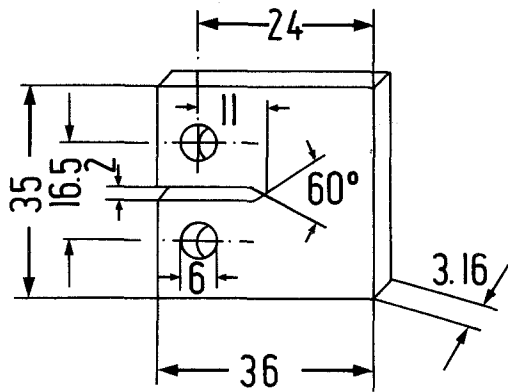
Dimensions (mm) of compact tension specimens used throughout this work.
